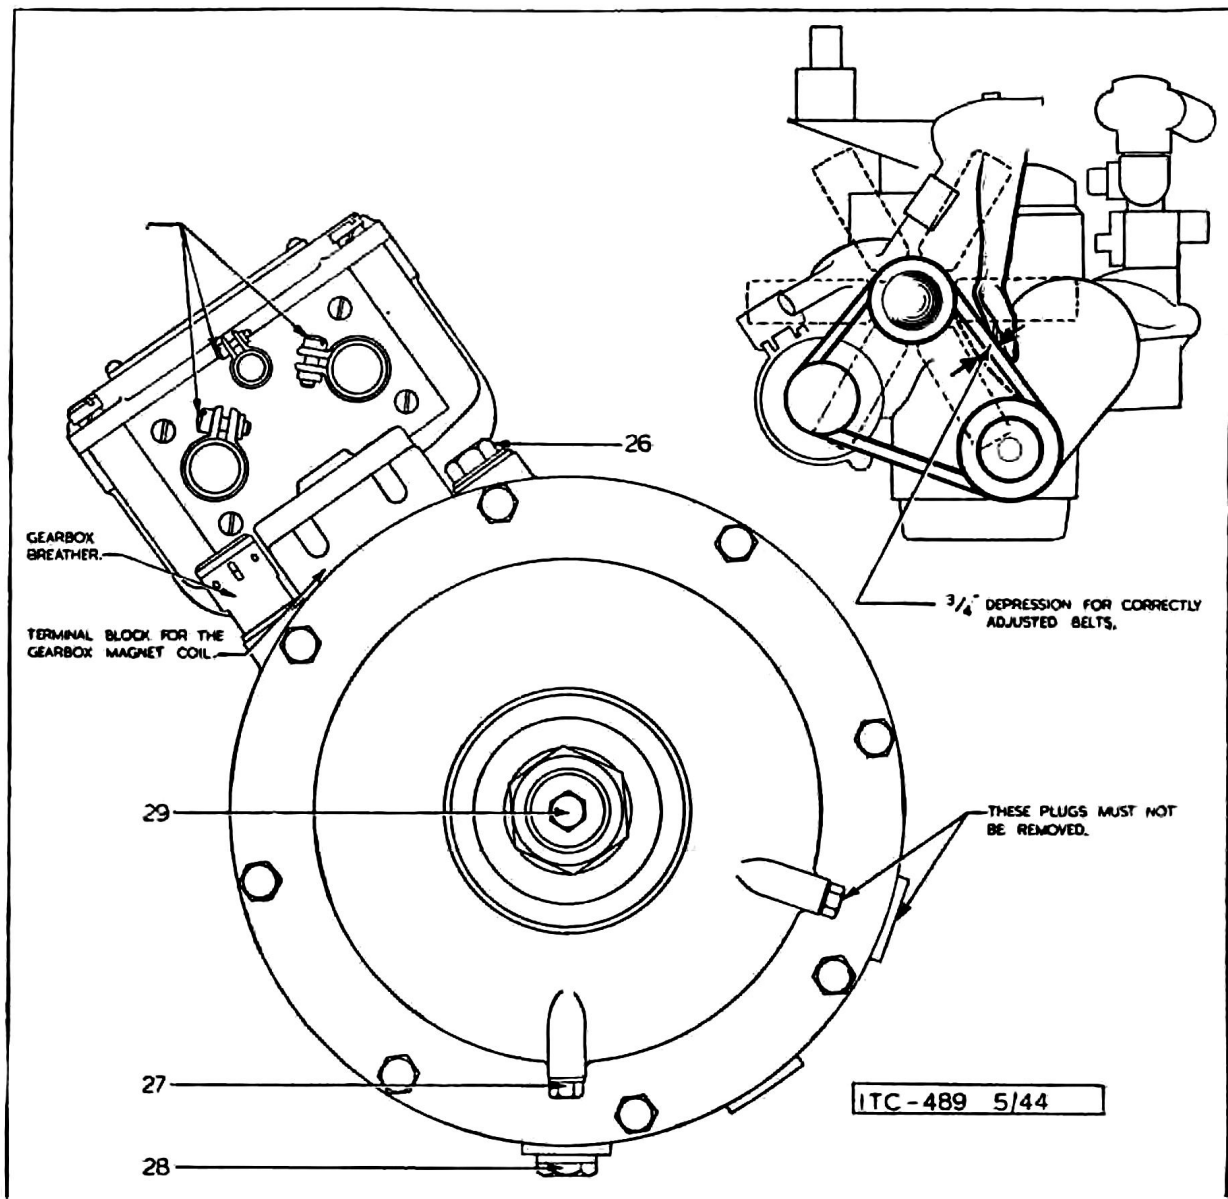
DYNAMO GEARBOX LUBRICATION POINTS AND BELT ADJUSTMENT.
